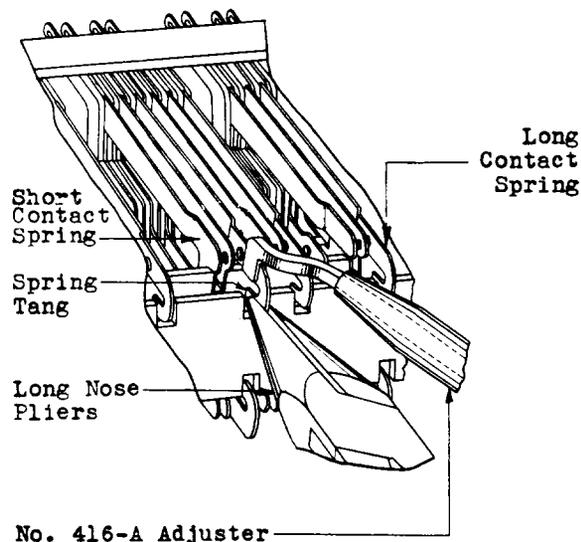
Method of Adjusting Spring Tang for Contact Separation and Tang Clearance
